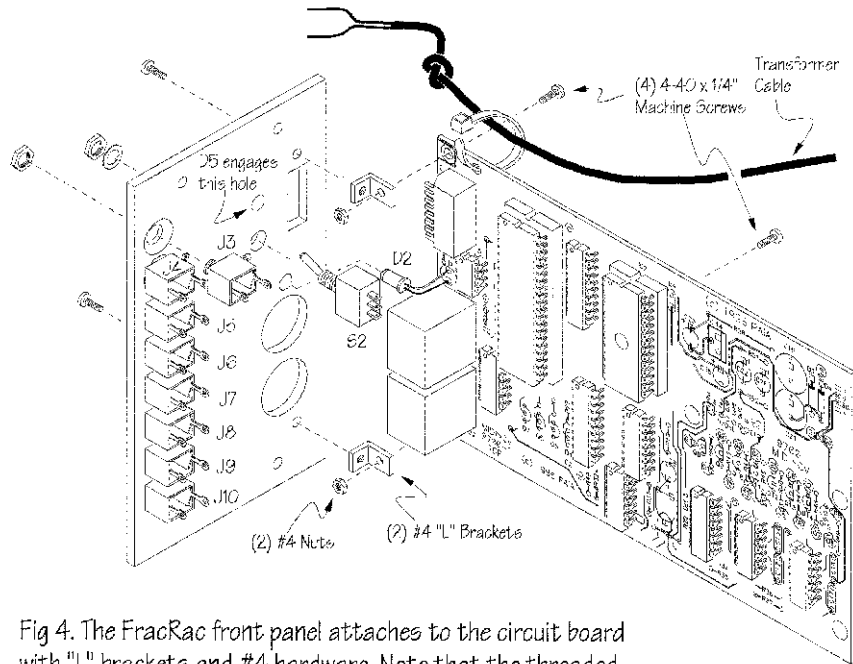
The FracRac front panel attaches to the circuit board with "L" brackets and #4 hardware. Note that the threaded holes are used to attach the brackets to the panel.
